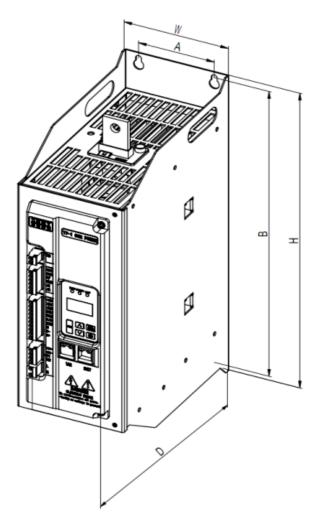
outline dimension and installation dimension of FTM1 series (With optional Heat/Dust Cover)
